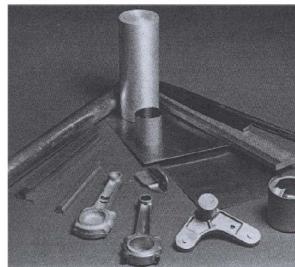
Extrusions, forgings, sheet and a pressure die casting fabricated from DRA (from Willis, T. C., *Metal. & Mater.*, 4, 485, 1988).
